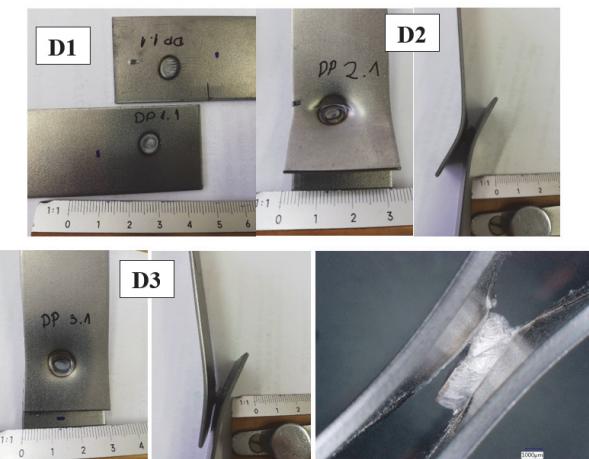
Typical fracture mechanism of DP500 steel RSW joint
